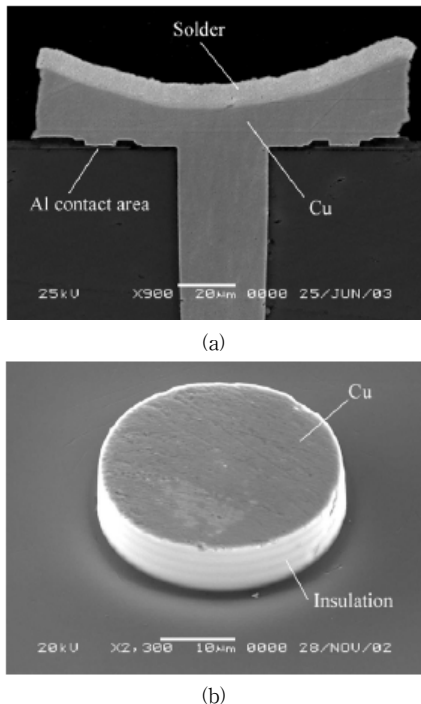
Bumps formed on the filling ; (a) solder/Cu bump on top side, (b) Cu bump on bottom side
